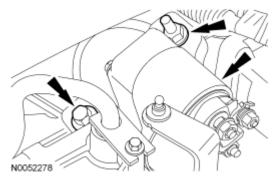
Identifying Bolt, Stud Bolt & Starter Courtesy of FORD MOTOR CO.
